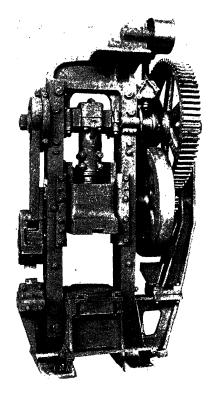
Mechanical forge press, cutoff attachment on left. Die blocks will be anchored in the dovetail slots of the crosshead and base. (Chambersburg Engineering Co.)
